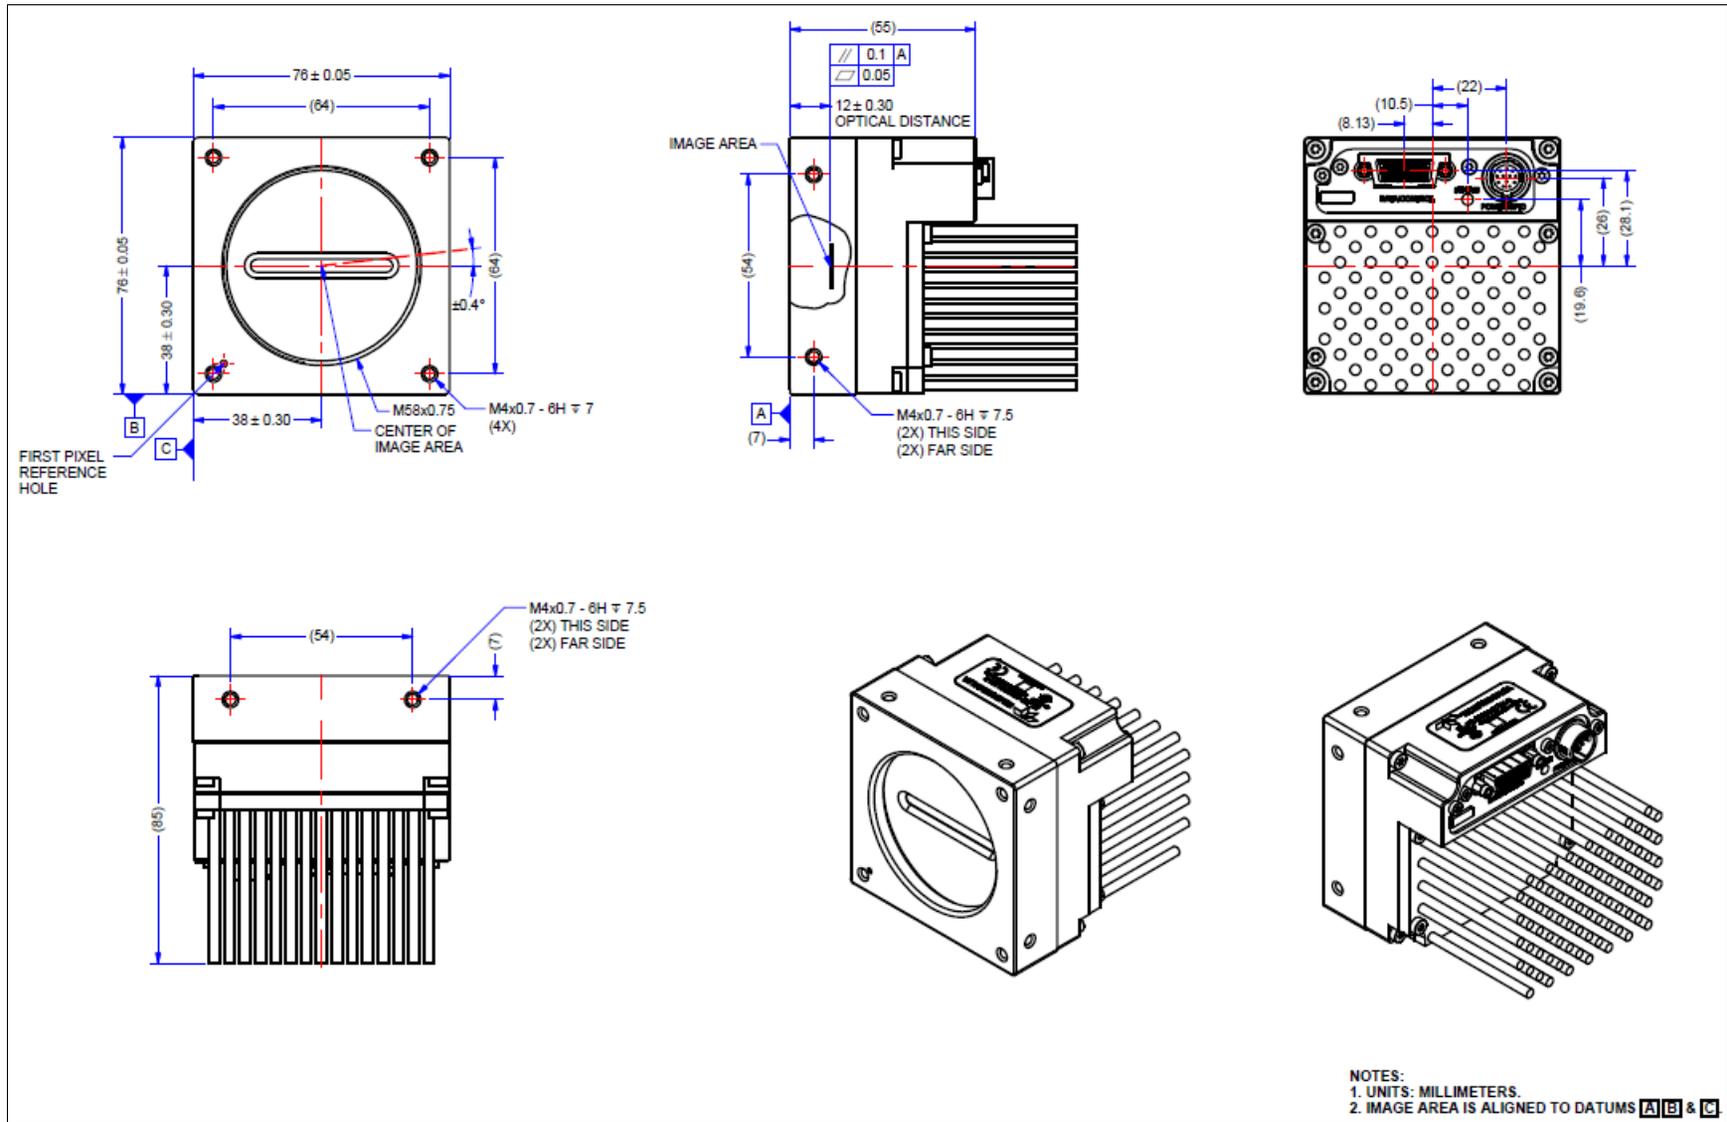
HL-HM-08K30H-00-R Mechanical Drawing
